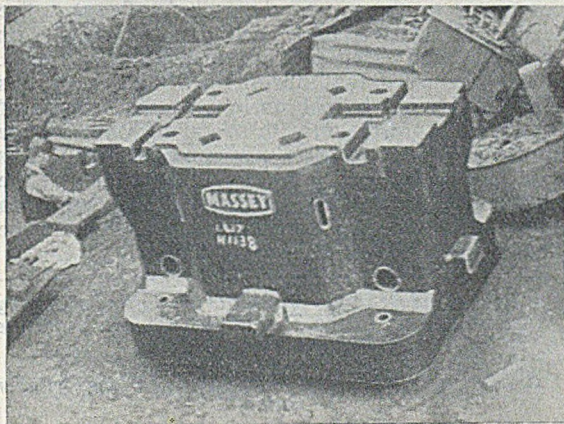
Complete Anvil-block Casting. Note the Smallness of the Holes produced by Coring.
